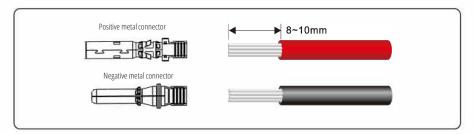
Removing insulation layer for DC cable (unit: mm)
